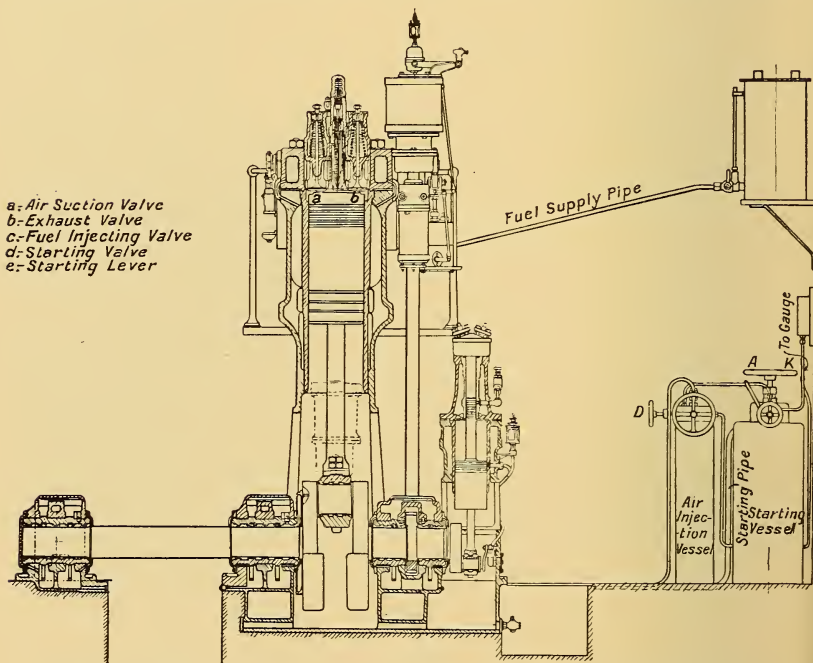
Sectional view of Diesel Oil Engine (Mirrlees, Watson and Co.).
